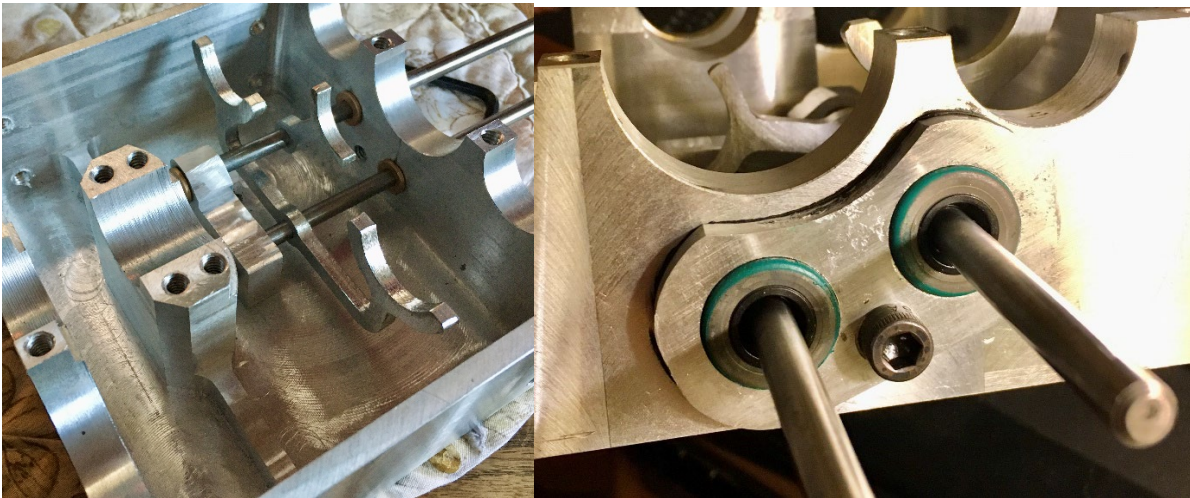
Finished Pushrod Assembly and Shaft Seals
